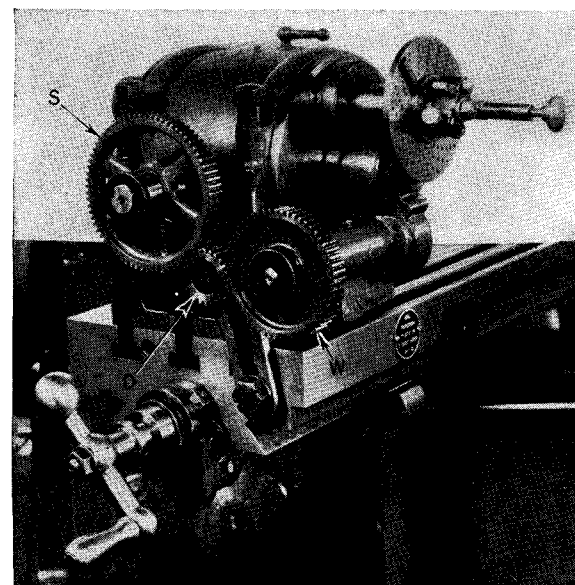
A Brown & Sharpe index head geared for 271 divisions. (The Brown & Sharpe Manufacturing Company)
